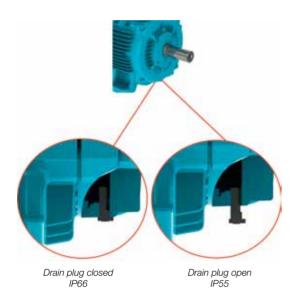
Detail of the drain plug position on the drive endshield (frames 160-355)
